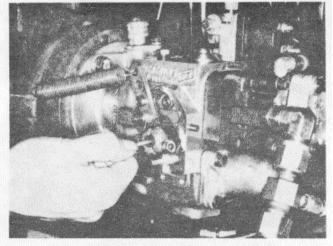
G-75. Adjusting Throttle Shaft Internal Fuel Adjusting Screw
